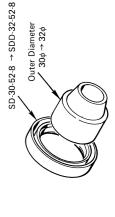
(Rear Wheel Oil Seal & Shaft Collar)
